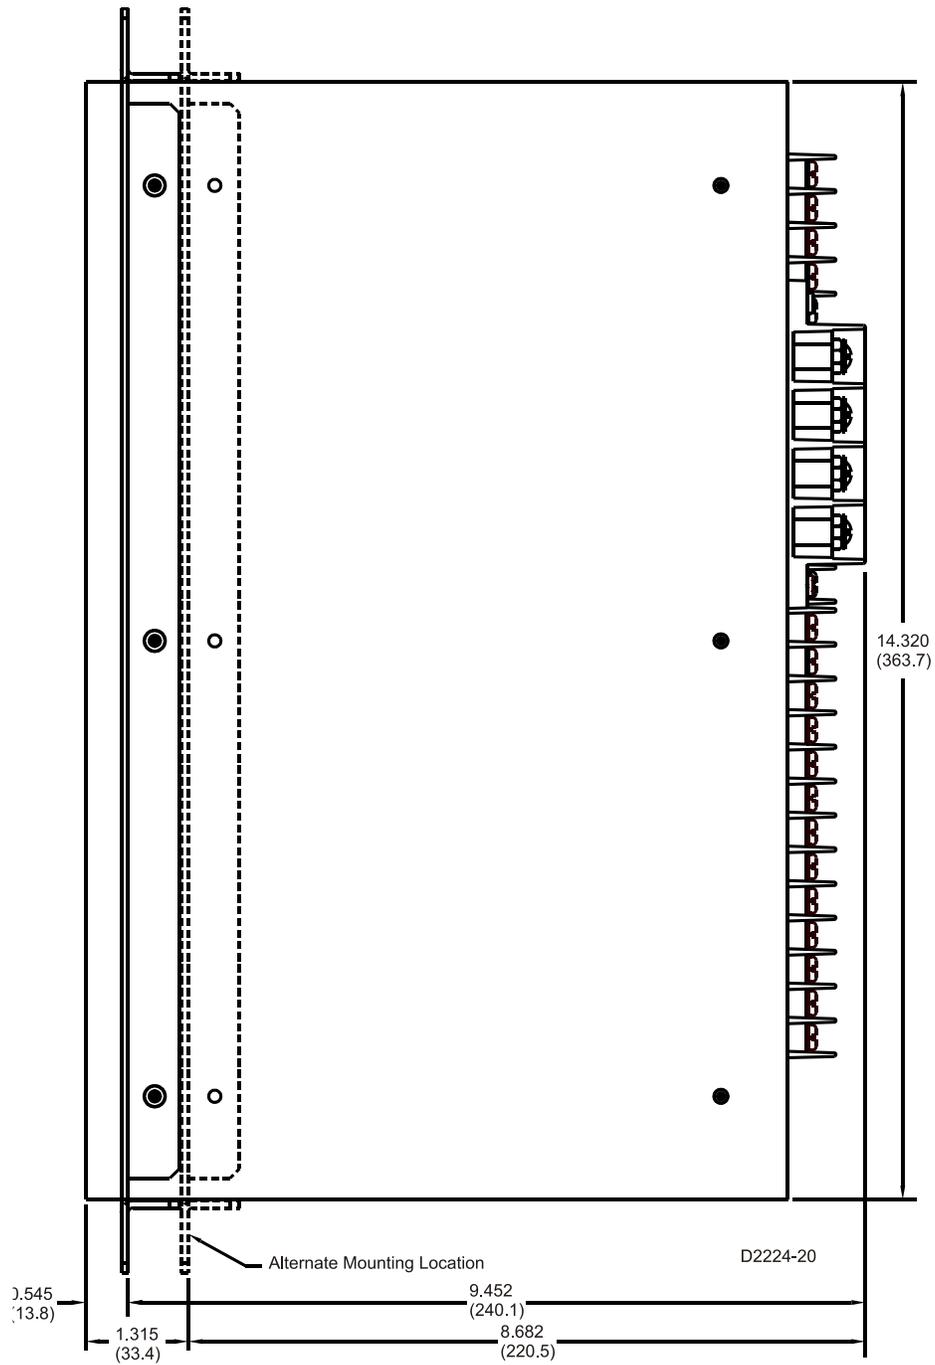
Overall Dimensions, Side View (Vertical Mount)
